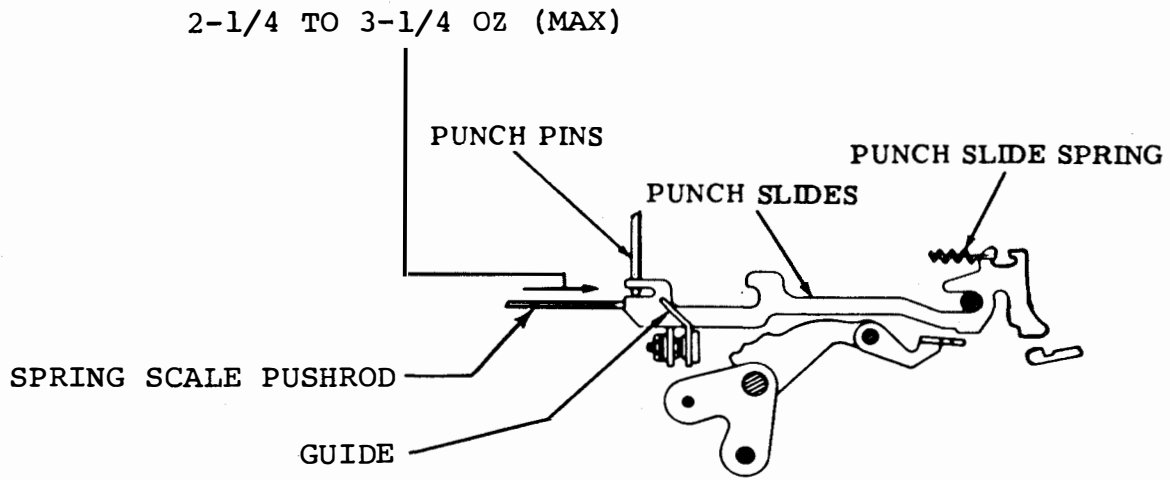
Punch Slide Spring (Fully Perforated Tape Mechanism)
